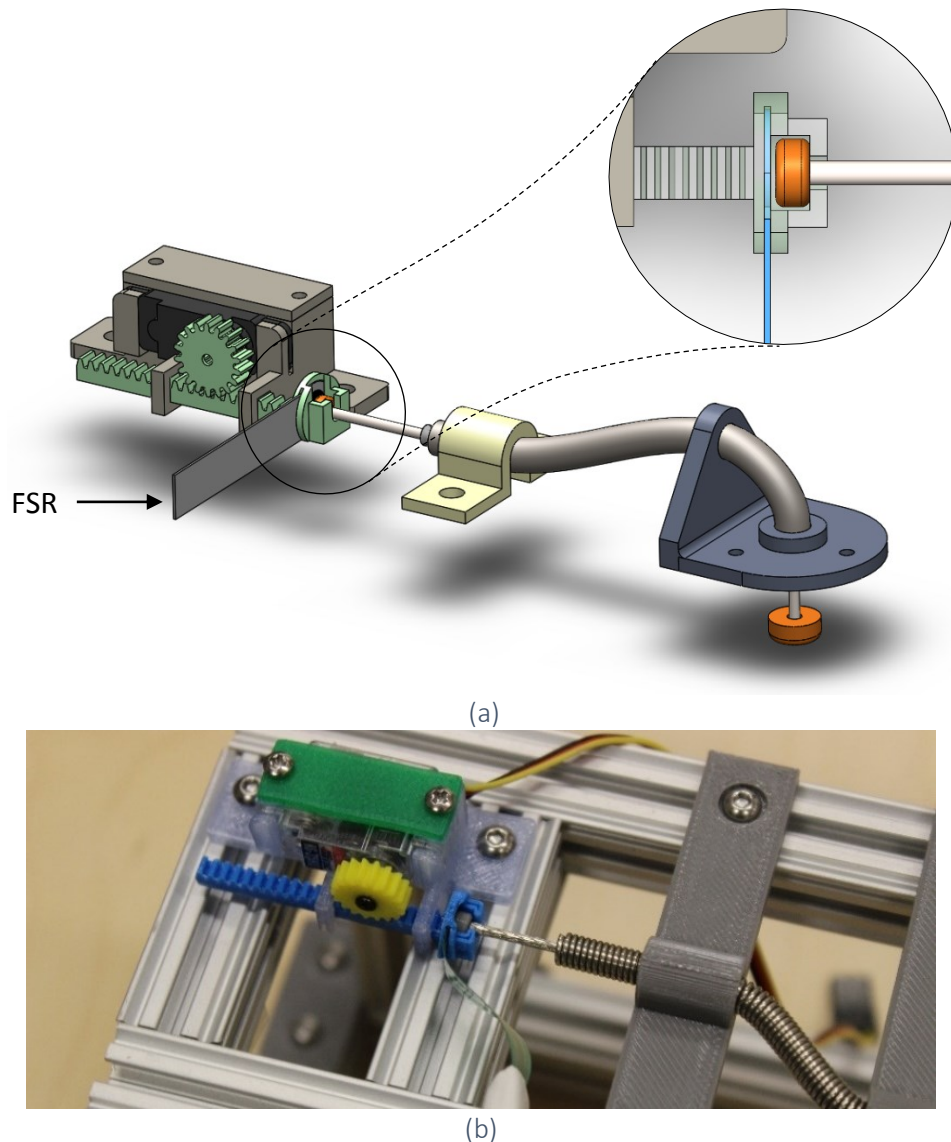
Incorporating FSR into rack gear, where (a) shows the tactor design, and (b) physical implementation of FSR placement
